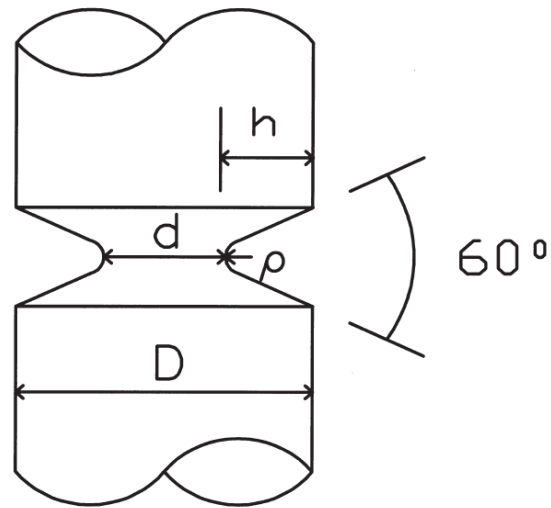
Gage section of the cylindrical specimen with a circumferential V-notch.
